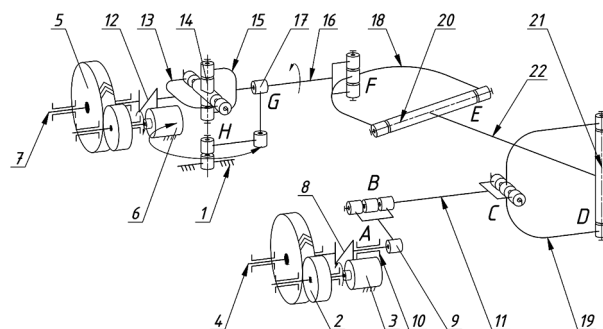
Kinematic diagram of a barreling machine containing spatial eight-link mechanism
